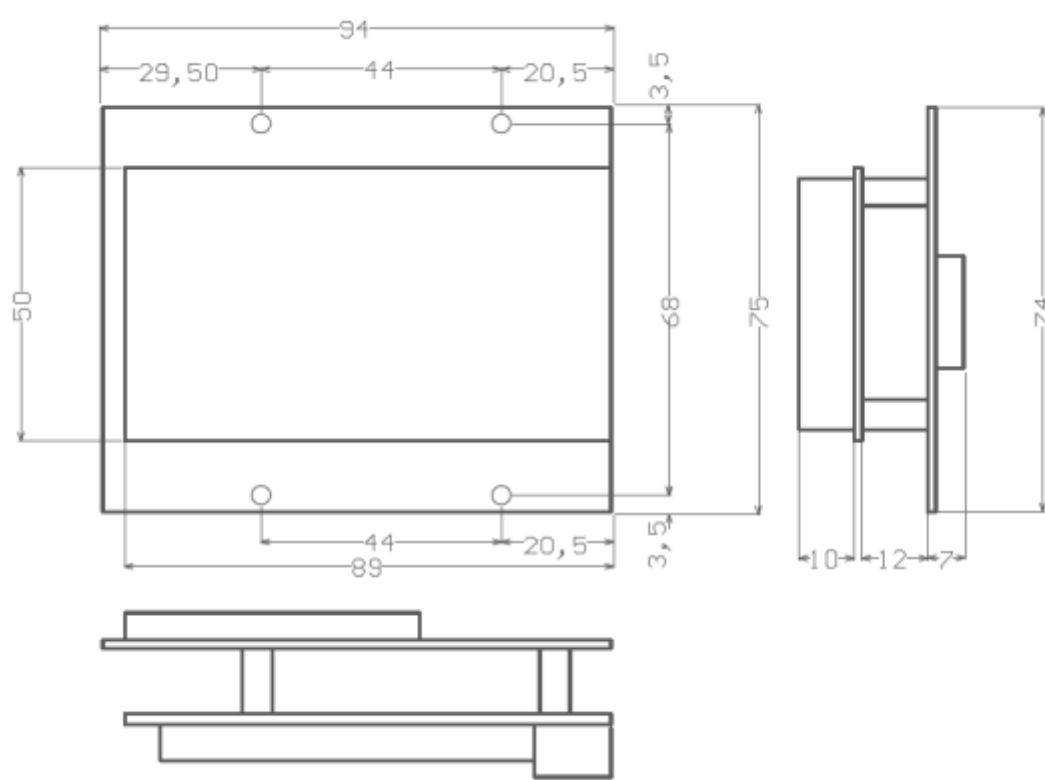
DOS048-004 Mechanical Outline (front, top and lateral)
